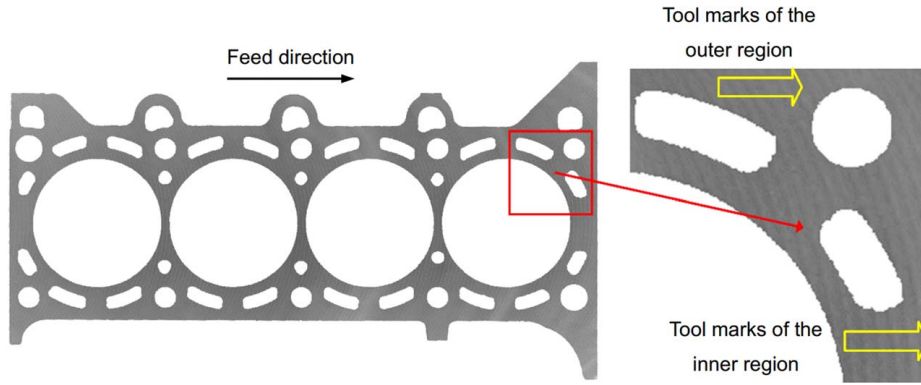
Original cycloidal tool marks on the face milled top surface of an engine block
